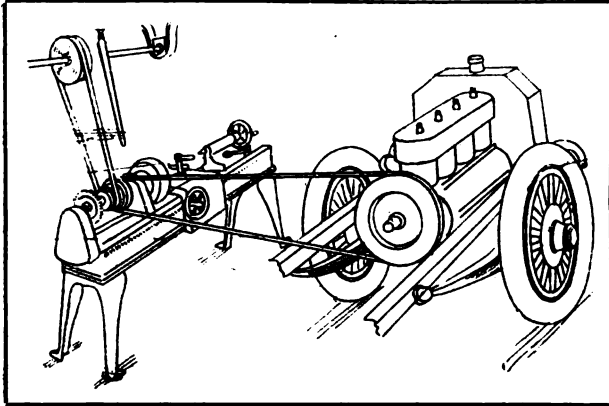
Connecting Flywheel with Lathe to Loosen Tight Bearings.
